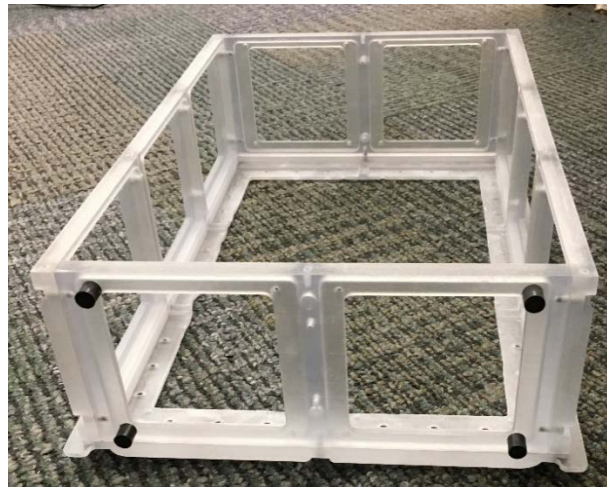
3-D Printed 6U Chassis with Contact Feet
